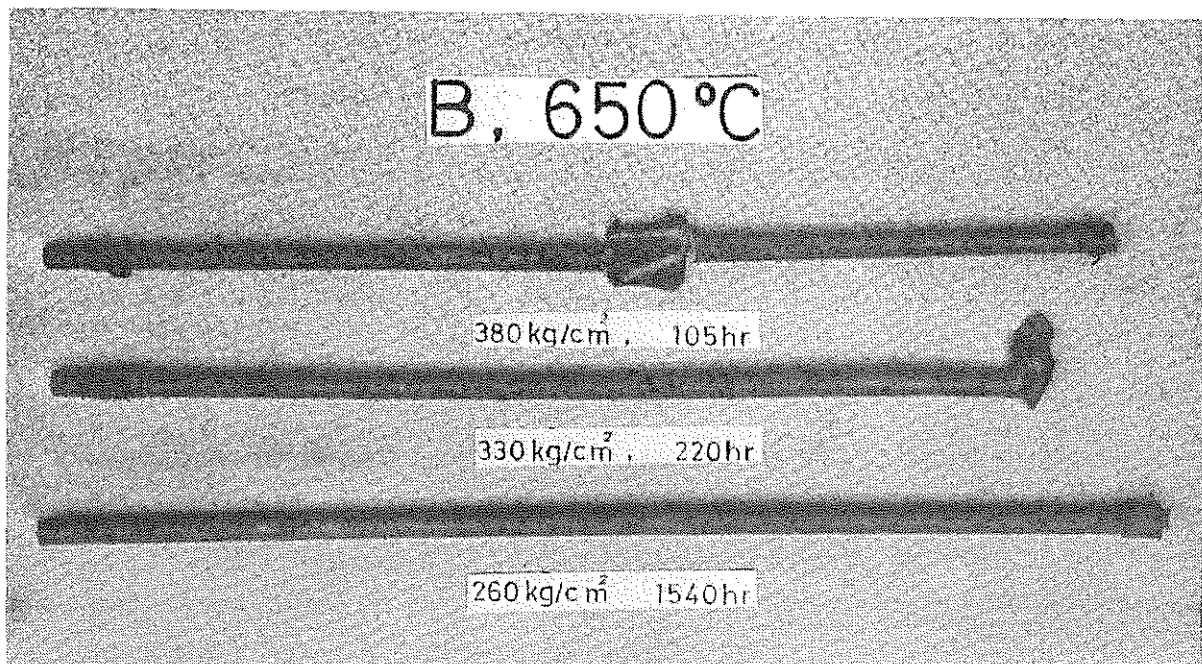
Appearance of Test Pieces after Internal Pressure Creep Rupture Tests (B material)
